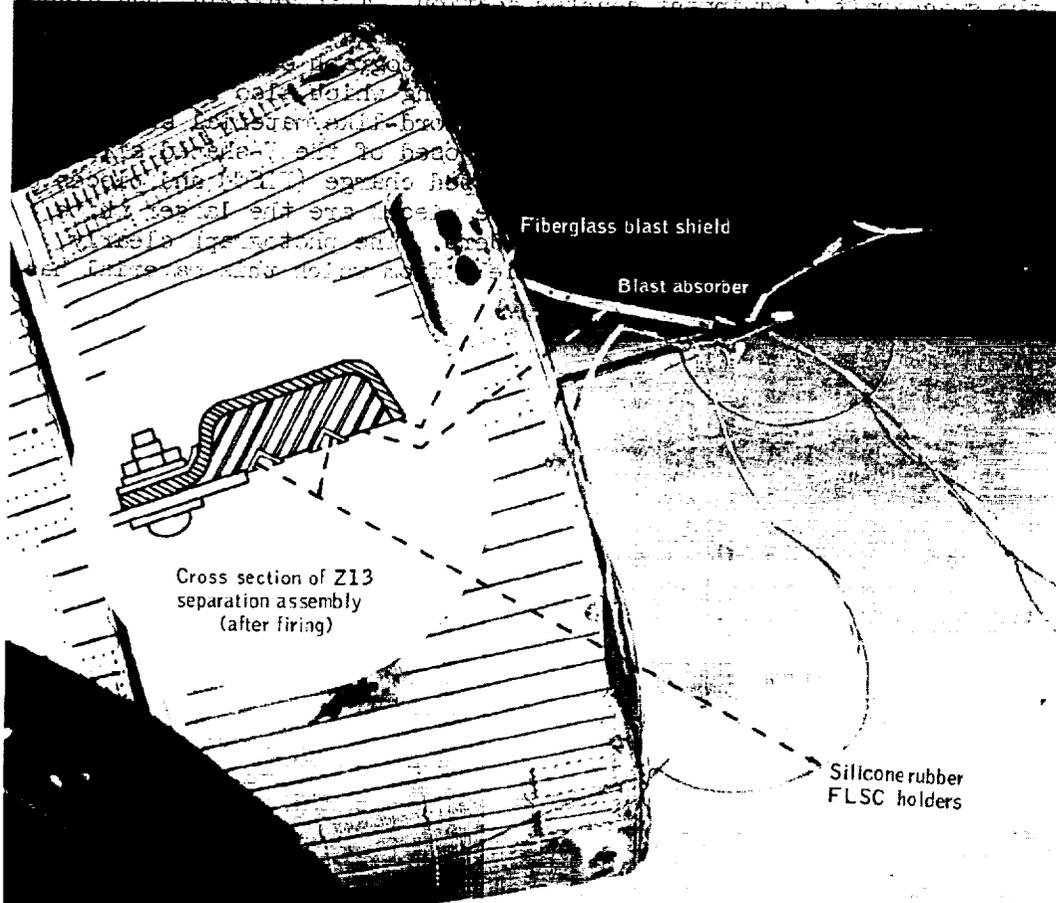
Inflight condition of fired Z13 shaped charge assembly.
